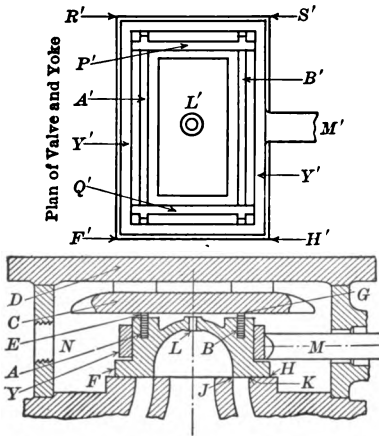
FIXED TYPE OF PRESSURE-PLATE VALVE
